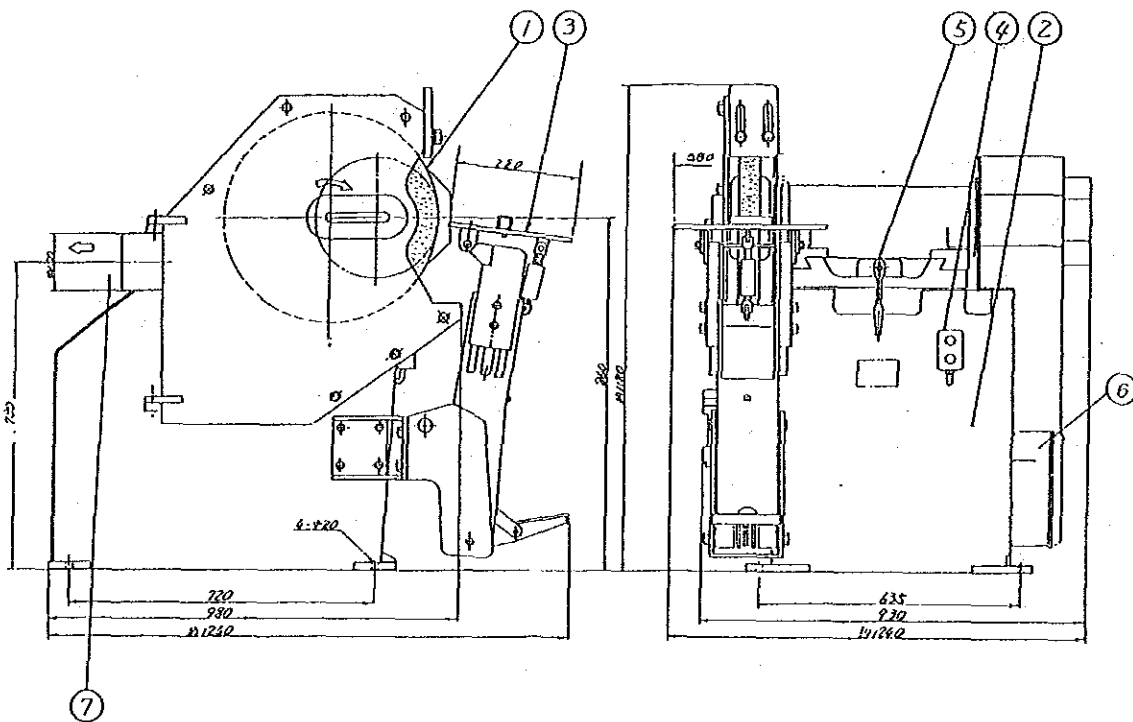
Constant Peripheral-Speed Fixed Type Grinder
